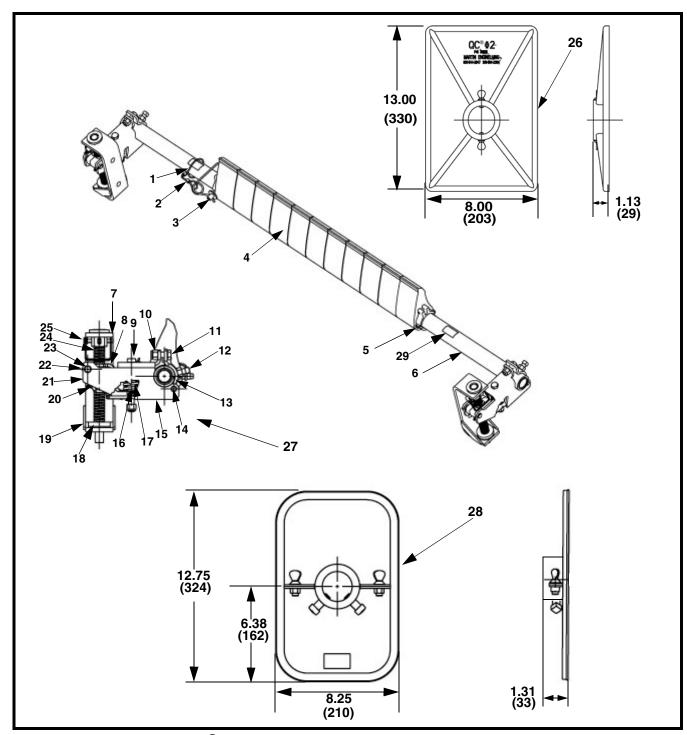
Martin[®] QC2TM Cleaner Assembly, P/N 35700-XXXXXXX* with Martin[®] QC2TM Cover Door Assembly, P/N 35857 and Martin[®] QC2TM Dust-Tight Cover Door Assembly, P/N 38014-QC2 (Sheet 1 of 2)
